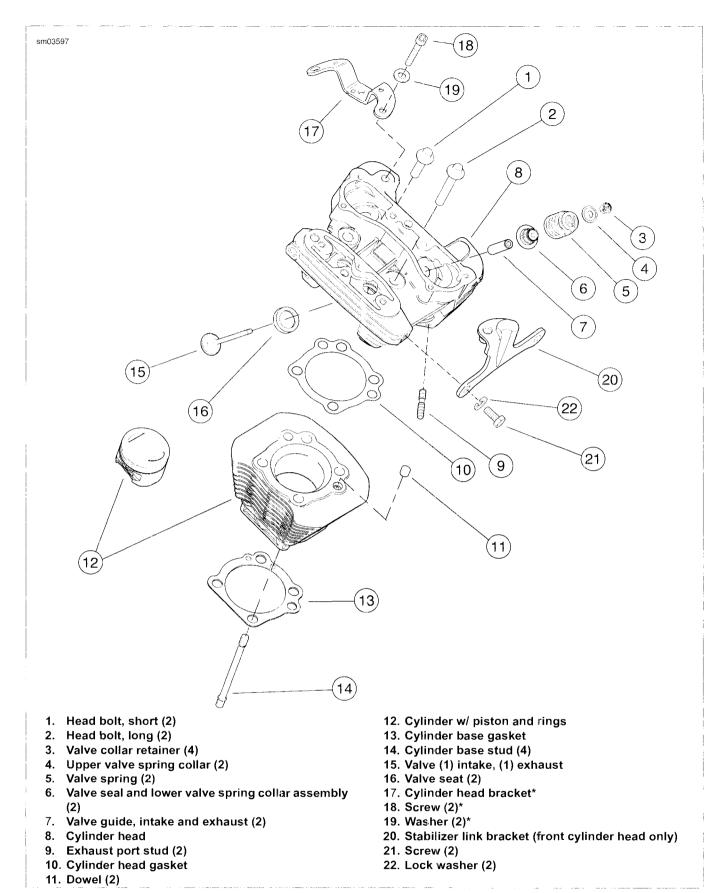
Cylinder Head, Cylinder and Piston Assembly (typical) (*Models with Side Mounted Horn Only)
